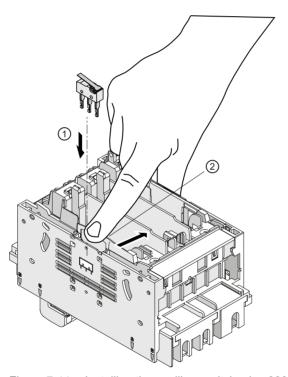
Installing the auxiliary switch, size 000 (1)
